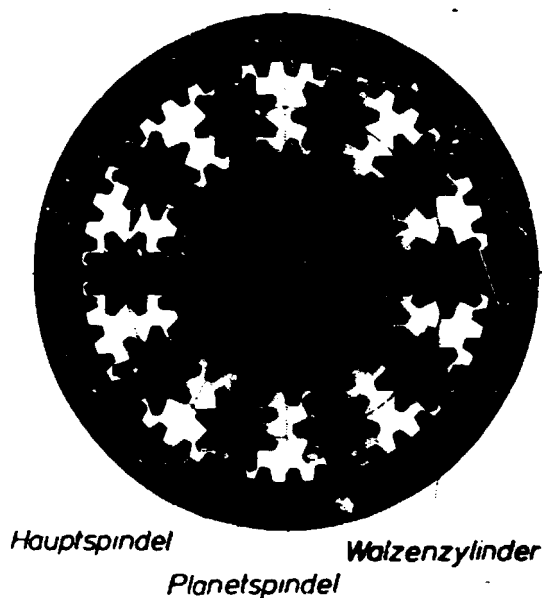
Section through the planetary roller extruder of the Berstorff machine
